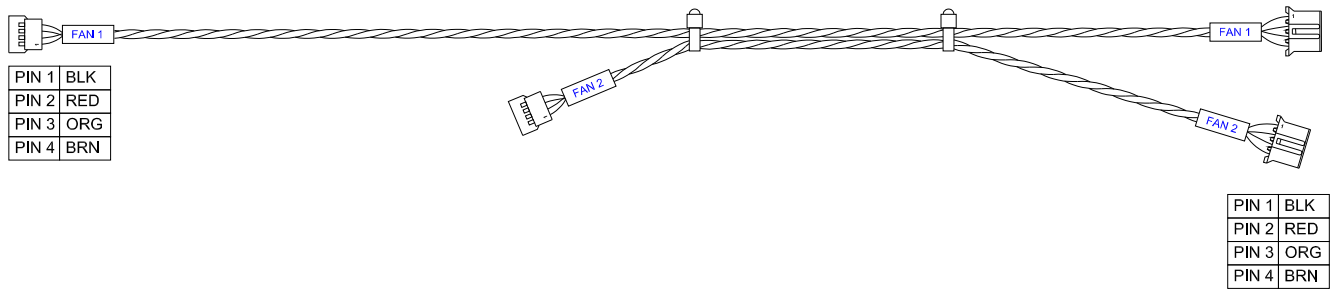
VL4000 BeamWash Inlet Fan Extension Cable Assembly
